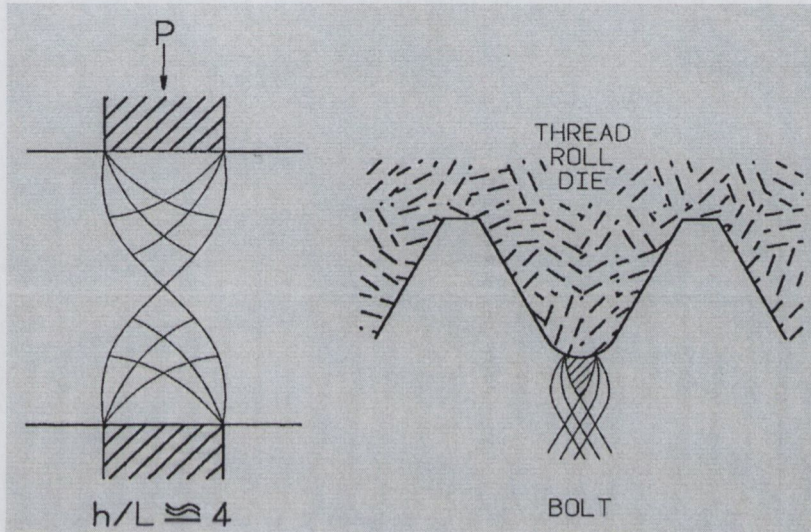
Maximum Shear surfaces resulting from the penetration of a tool and the observed deformation lines in a thread root
